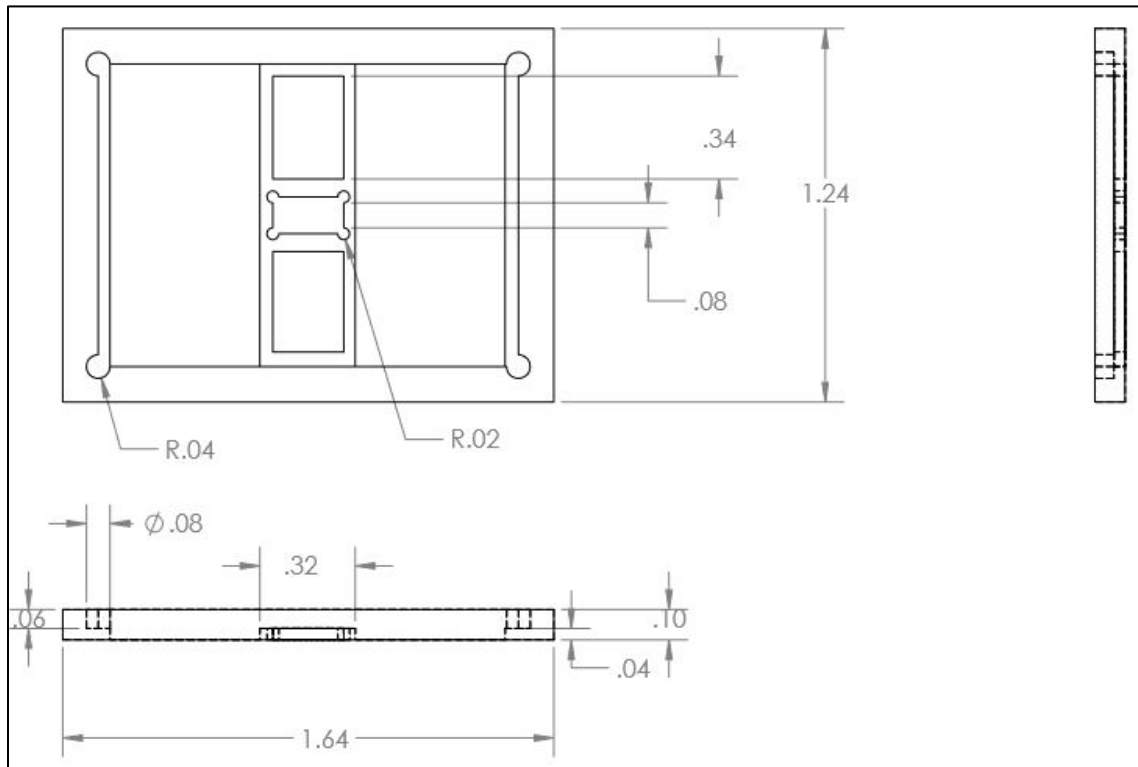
Plan and elevation drawings with dimensions for the mechanical fixture
